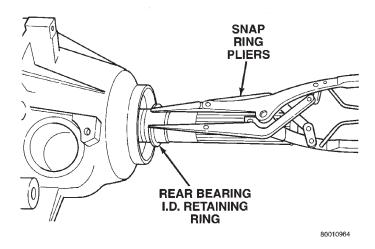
Rear Bearing I.D. Retaining Ring Removal
